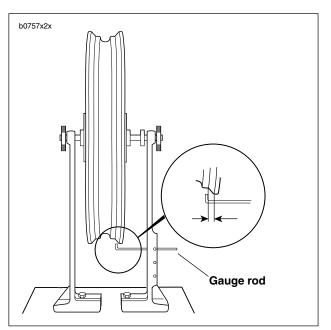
Checking Cast Rim Lateral Runout Using Wheel Truing and Balancing Stand (HD-99500-80)
